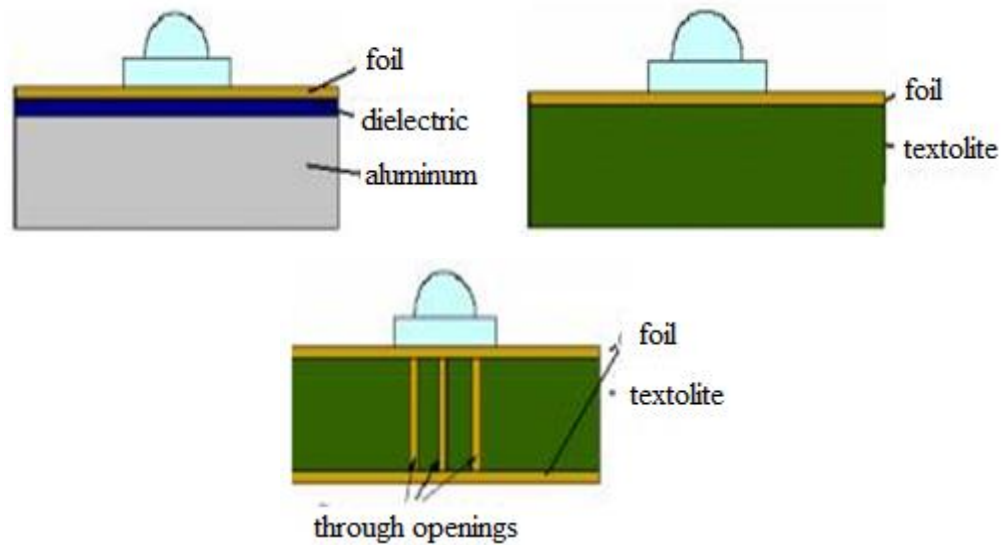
Mounting options: a) Al PCB; b) fiberglass FR4;
